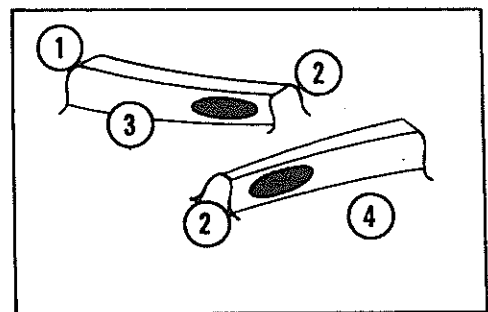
RING GEAR TOOTH BEARING PATTERN, UNLOADED
